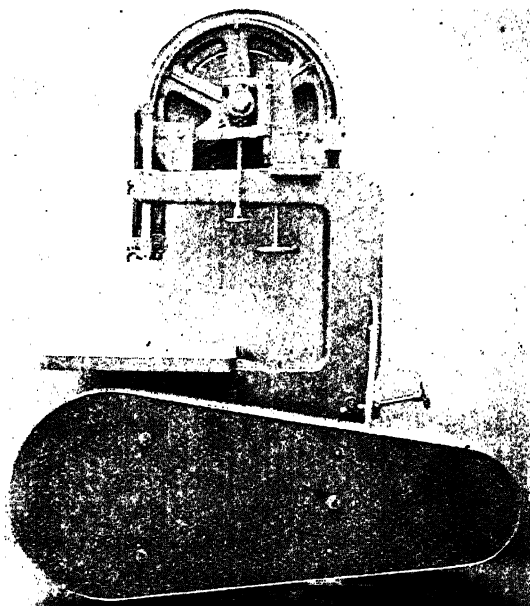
A HIGH-SPEED "MIDSAW" BAND-SAWING MACHINE SUITABLE FOR CUTTING SHEETS AND SHAPED PANELS
